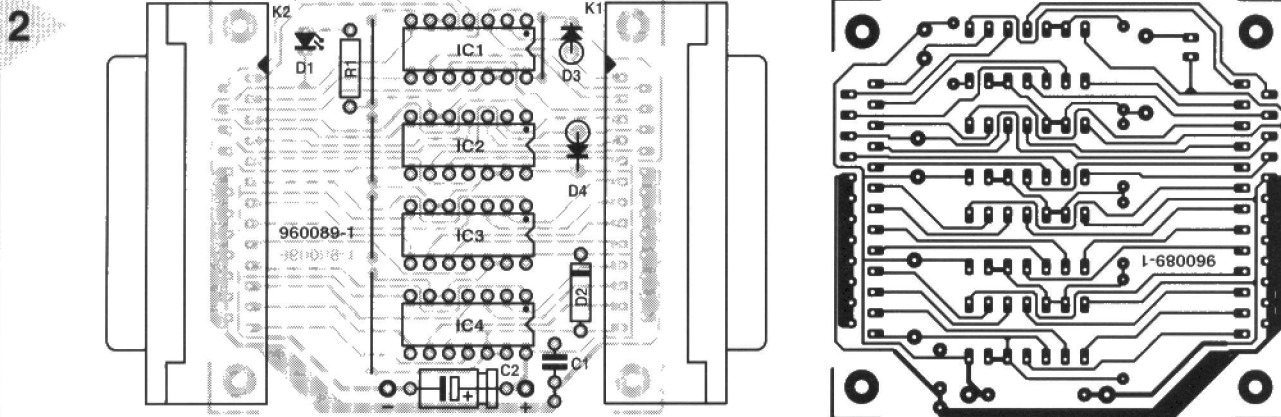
Copper track layout and component overlay of the PCB designed for the circuit. All components, including the two connectors, are mounted on this board (board available ready-made, see Readers Services pages).
